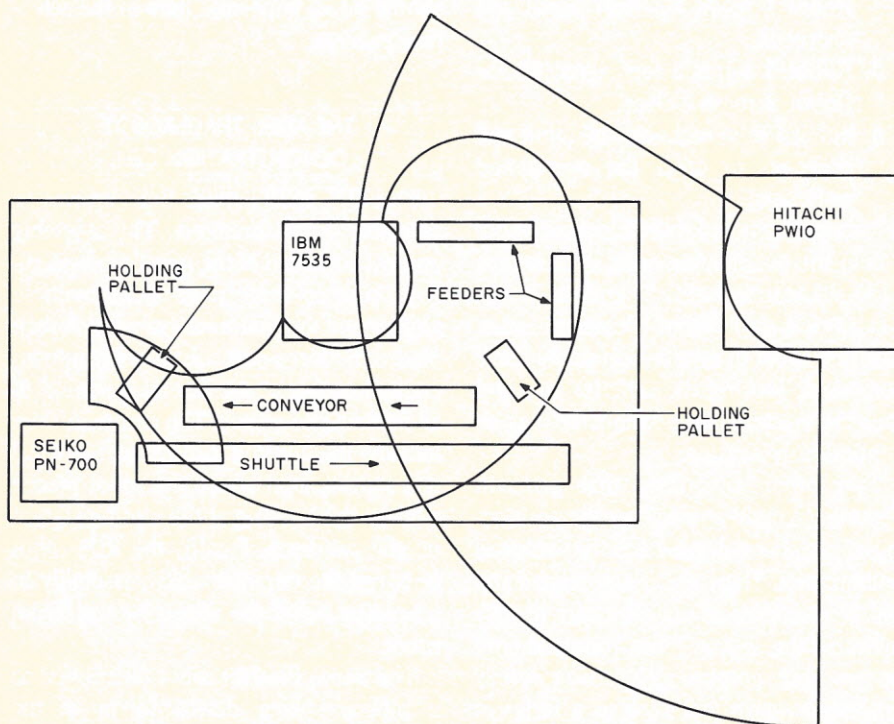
Gulf+Western's three-robot workcell, demonstrated at this year's Robots 9, used dissimilar robots made by three different companies to assemble and disassemble circuit boards. The IBM 7535 performed the assembly, the Seiko PN-700 performed a part transfer, and the Hitachi PW10 disassembled the breaker and returned the parts to the feeders. Notice the overlapping work envelopes.
